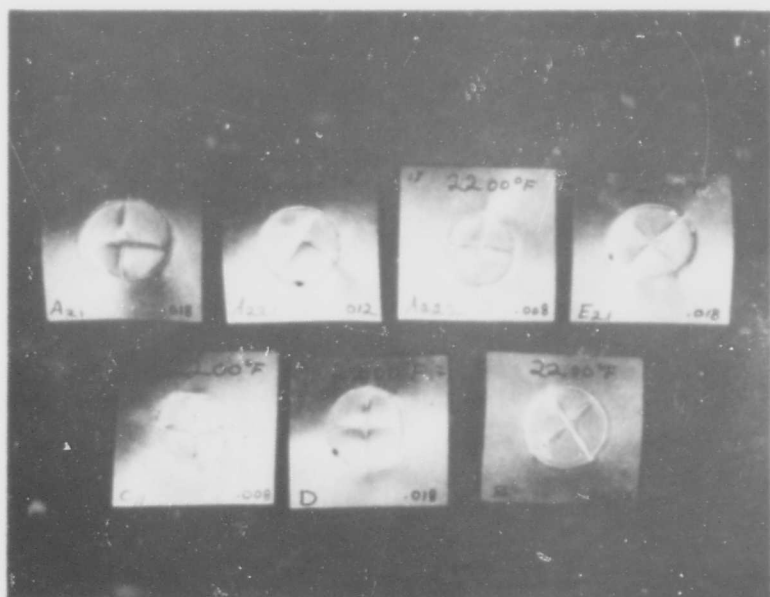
Patch weld test in Cb-752 sheet (Specimens identified as to annealing temperature and sheet thickness).
